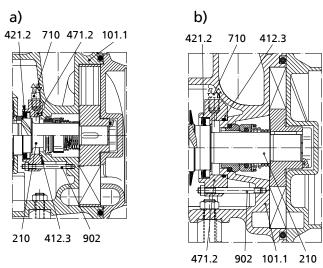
Mechanical seal design T, operating mode BQ a) Sizes 40-146, 50-164, 60-200, 65-200, 80-240-11 and 80-240-15 b) Sizes 42-146 and 52-164
